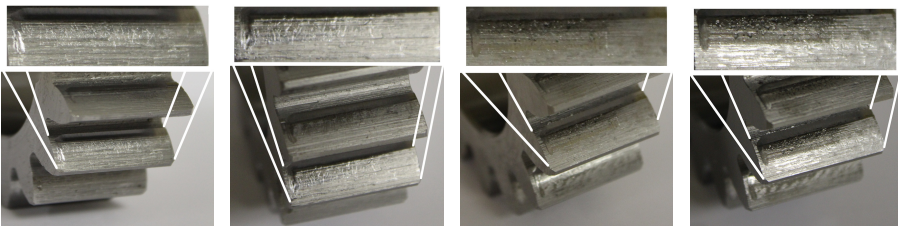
Gear at the end of test 3. Fig. 5. Gear at the end of test 5. Fig. 6. Gear at the end of test 7. Fig. 7. Gear at the end of test 9.
